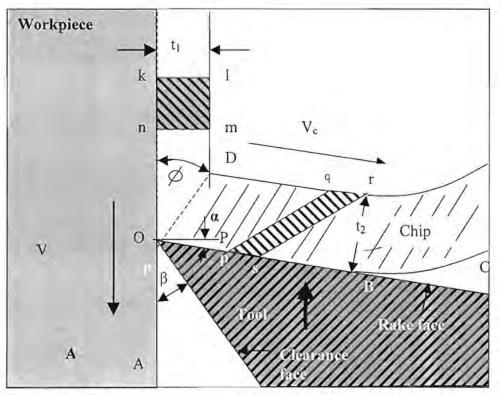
Metal cutting diagram for the tool and the work-piece (Trent, 1977)
